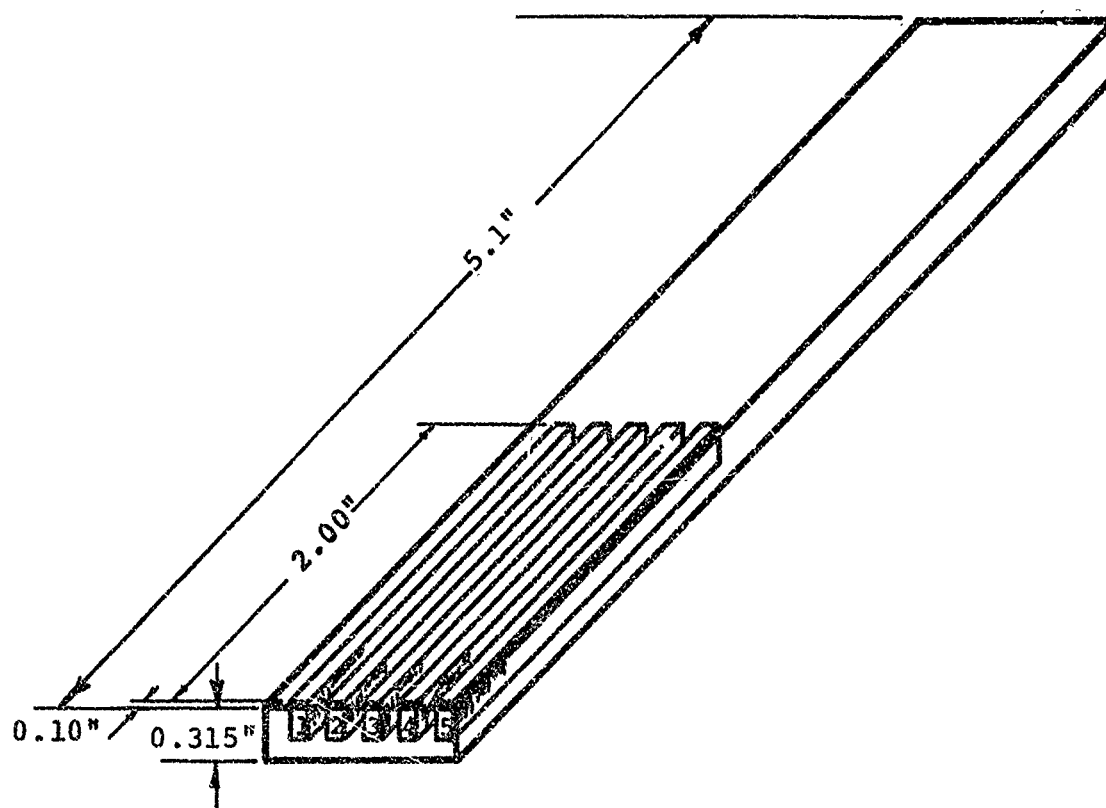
Cutting Plan - Specimen Blanks 3A09-136 and 3A09-137
